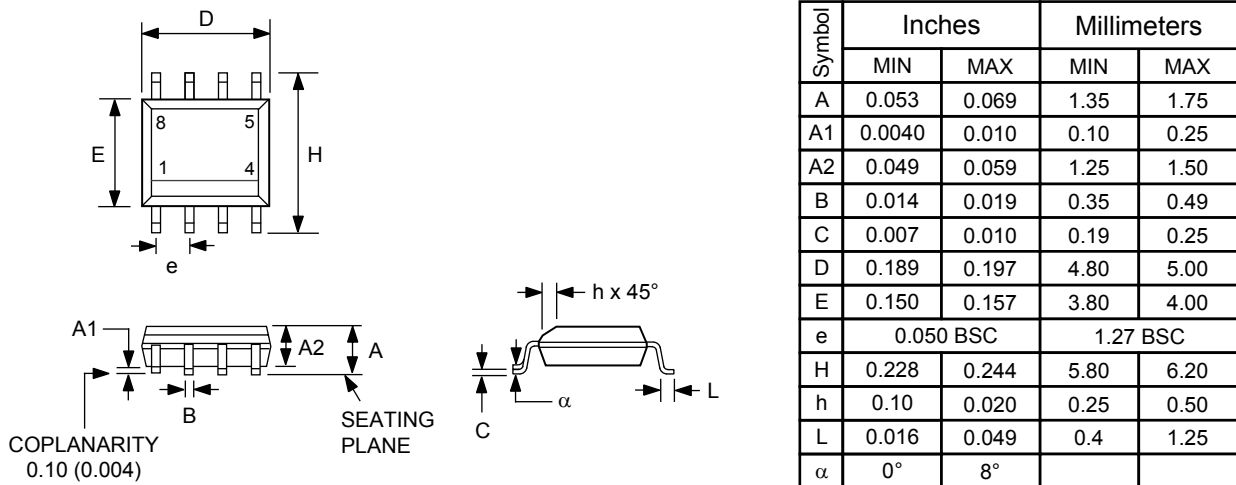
Physical dimensions, 8-lead SOIC package
